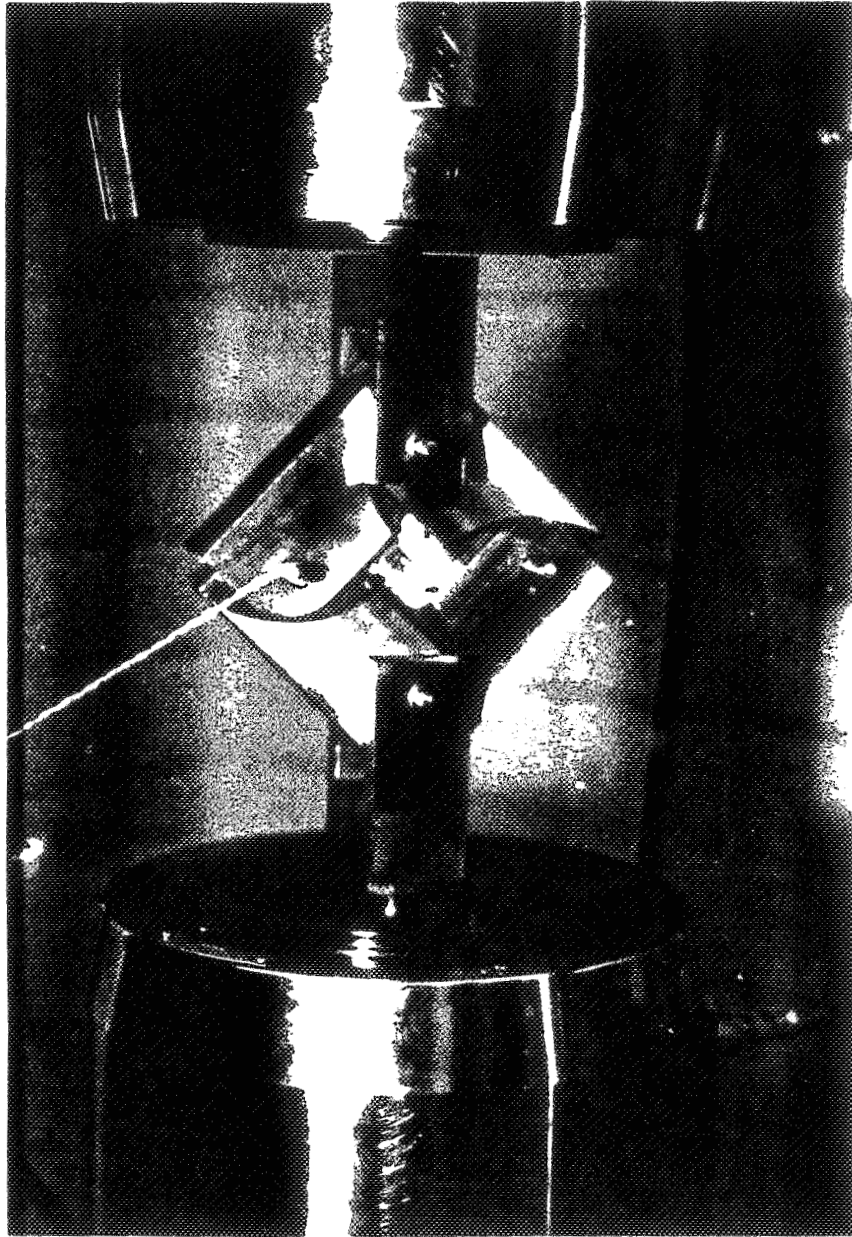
The Assembled Fixture and Specimen in the Testing Machine
